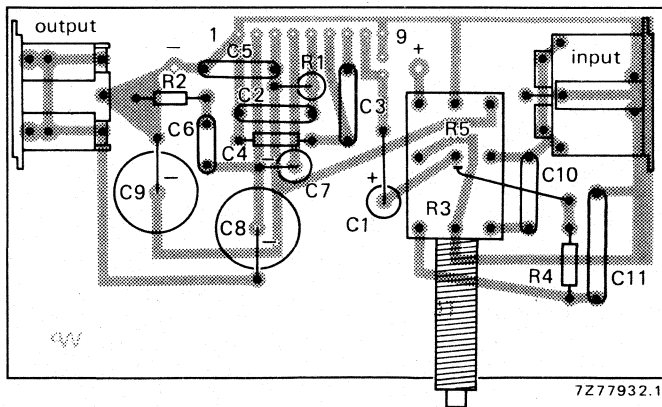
Component side of printed-circuit board showing component layout used for the circuit of Fig. 9.
